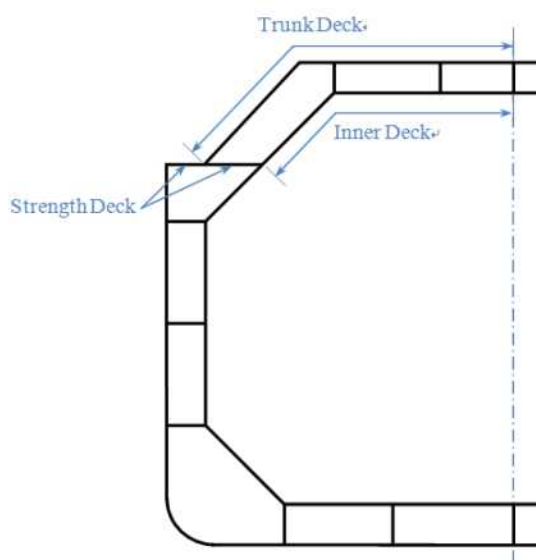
Typical deck arrangement for membrane type Liquefied Natural Gas Carriers
